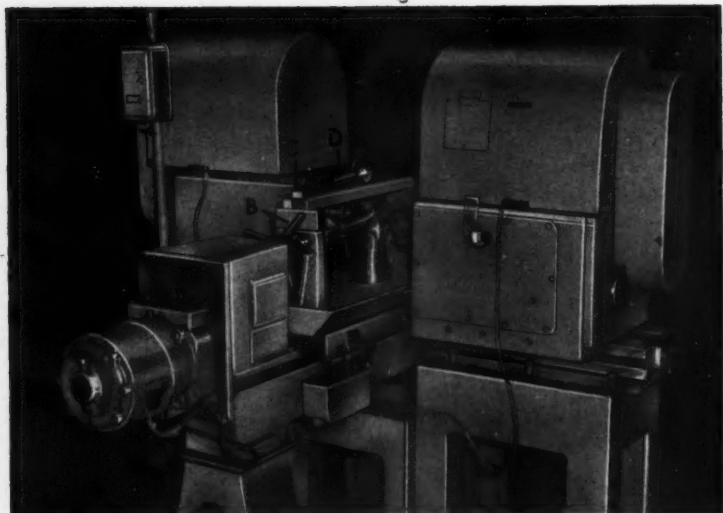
Also built by the company, this duplex machine has two unit heads with cutters of 4.92 in. diameter, and mills faces surrounding apertures at each side of the column portion of the sewing machine arm casting
